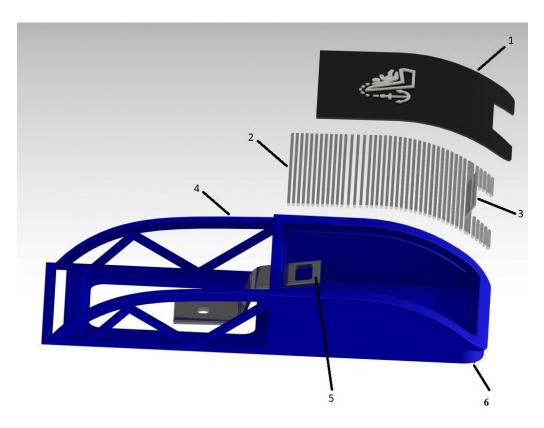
The figure shows the exploded view of the bread container. (1) represents the top surface, (2) shows the rib in closed position, (3) is the handle on the rib that users use to open and close. (4) is the body where the left half of it would go underneath the parcel shelf. (5) shows the anchorage. (6) shows where on of the clips is situated, used to attach to the parcel shelf.
